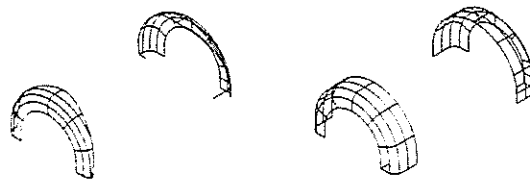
Trimmed surfaces, base surfaces, and wires of the rear fenders
